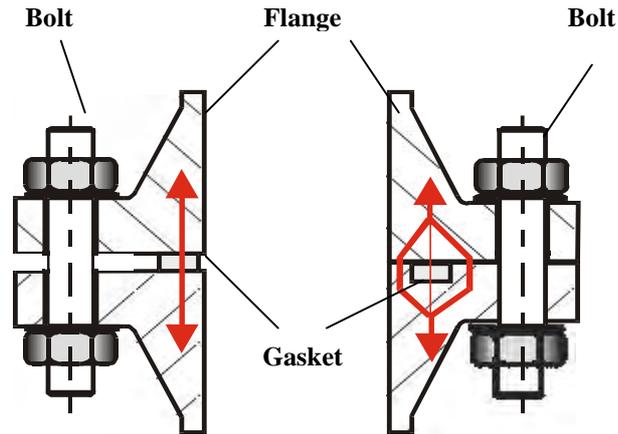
Bolted flange connections of floating (left) and metal-to-metal contact type (right)
